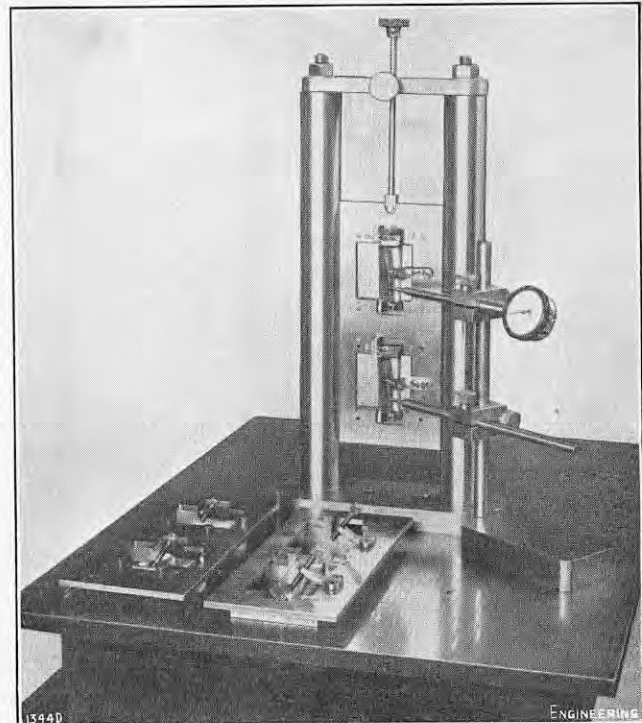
FIXTURE FOR CHECKING BLADE PROFILE.
